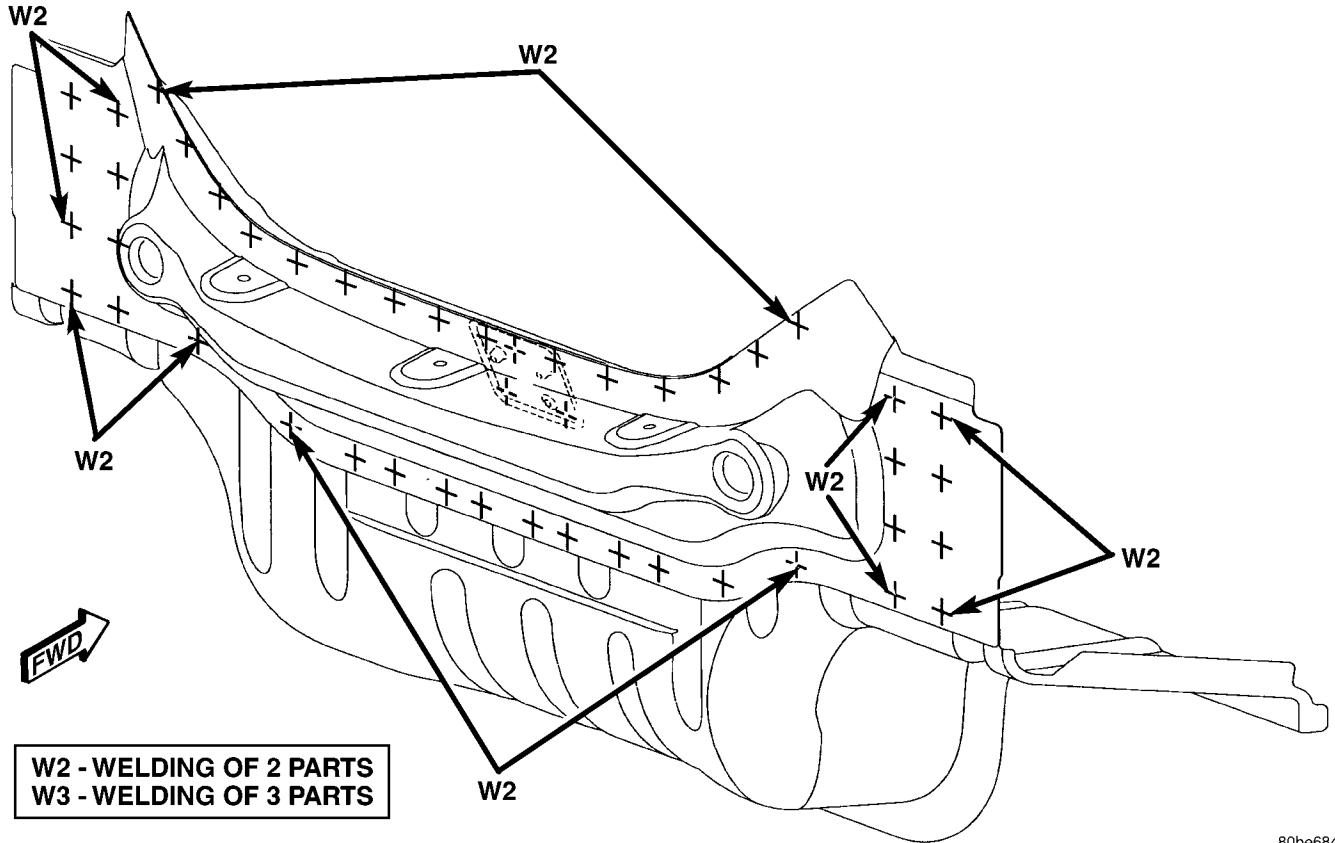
SHOULDER BELT SUPPORT GUSSET AND INNER REAR WHEELHOUSE CROSSMEMBER SUPPORT TO REAR FLOOR PAN BRACKET
